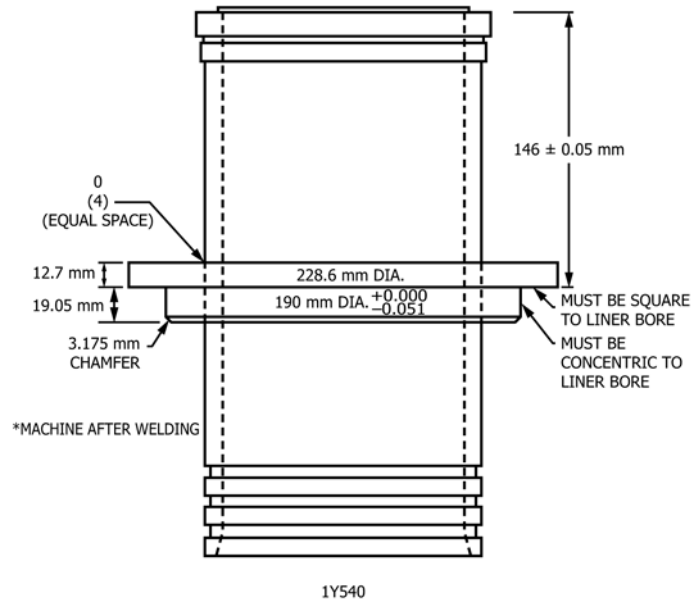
Jet Alignment Fixture (2W6000 Liner)
